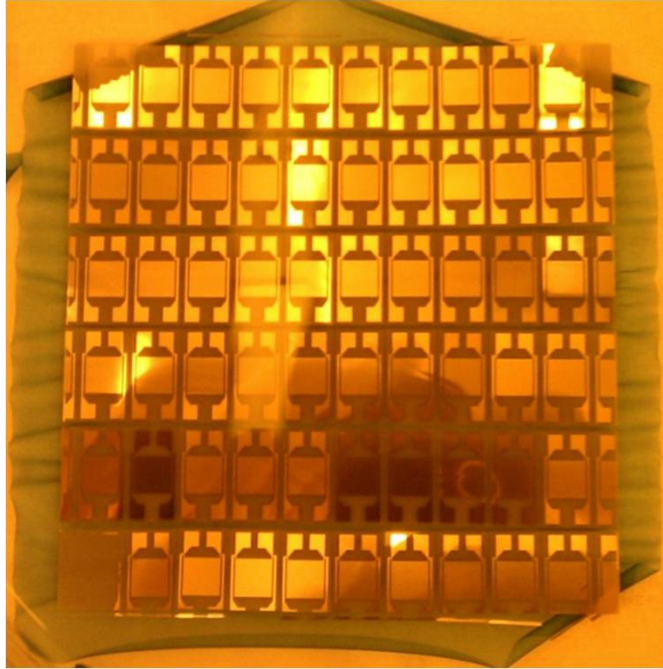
“Bulk” Processing of $5 \times 5 \text{ mm}^2$ Au Serpentine heaters with solder pads. Photo taken right after dicing step while protective dicing tape still attached.
